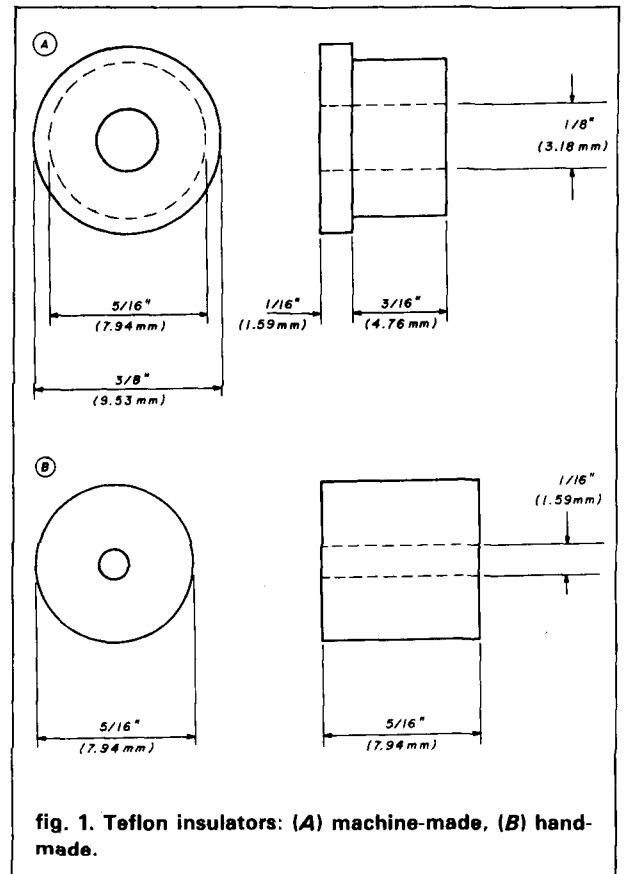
Teflon insulators: (A) machine-made, (B) hand-made.
